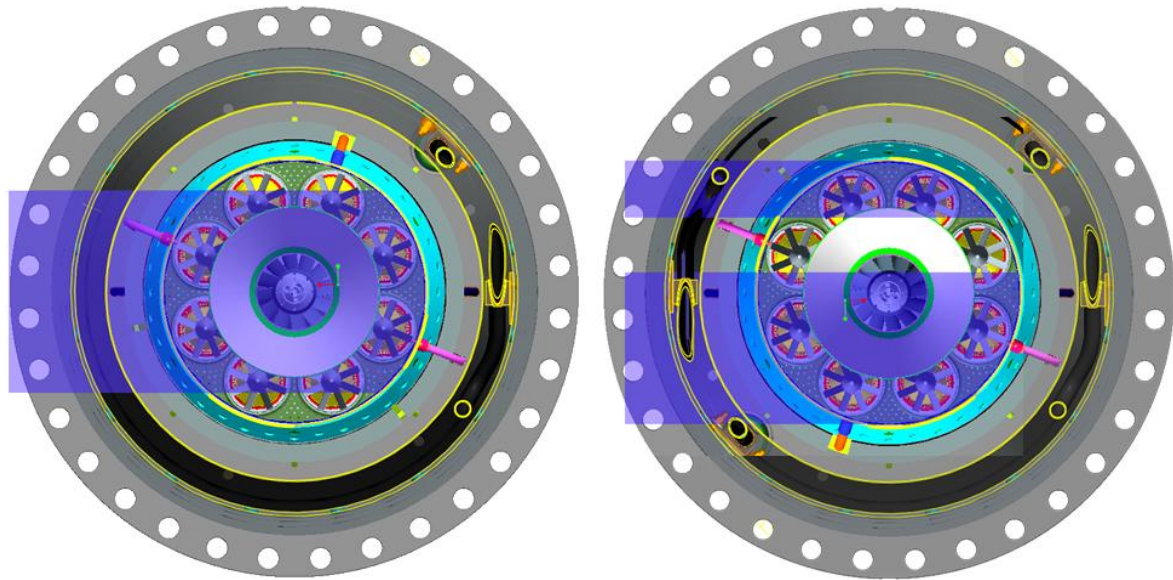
ULN burner with indicated laser sheet; installed in standard position (left hand side) and turned by 180° (right hand side)
